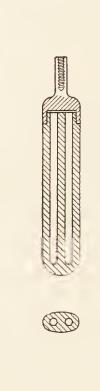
Silver screen 1 mm. thick adapted to contain two tubes side by side and fitted with screw terminal.
